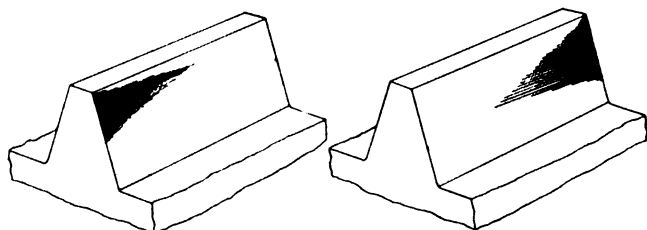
Move Gear toward Pinion FIG. 10 Move Gear away from Pinion
